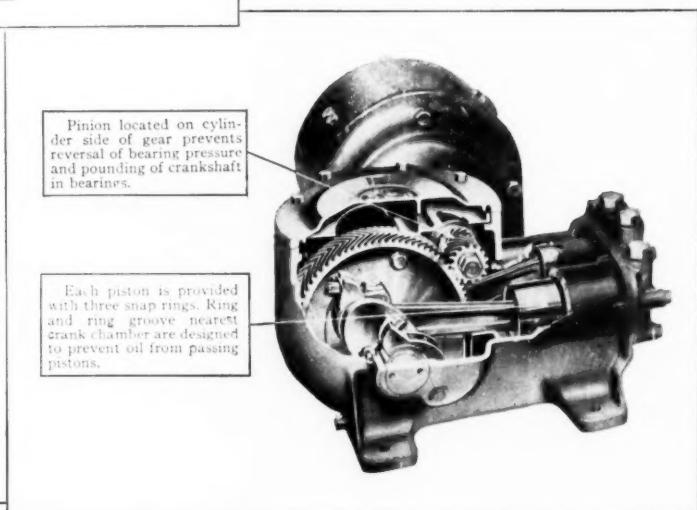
Cutaway views of a G.E. electric railway air compressor showing details of the self-contained lubricating system.
